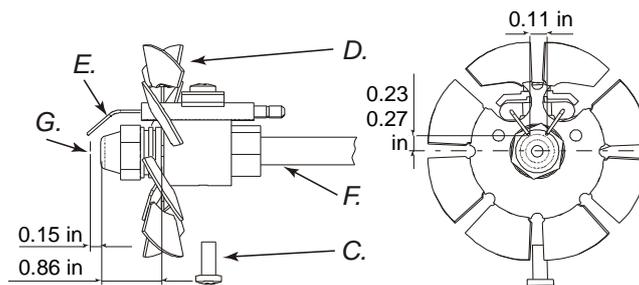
Specifications for electrode assembly on the nozzle holder tube.
